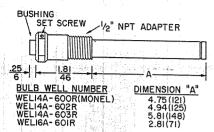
Bulb well for liquid immersion applications where a temperature bulb may be removed without draining tank.
